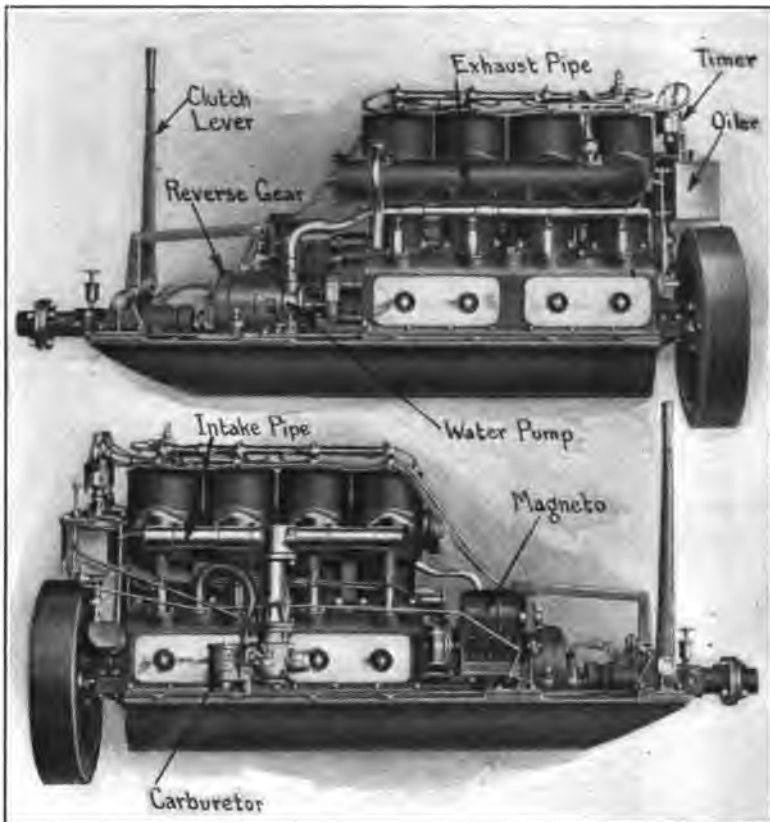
Exhaust and inlet side of the Van Blerk four-cylinder marine motor with reverse gear attached.
